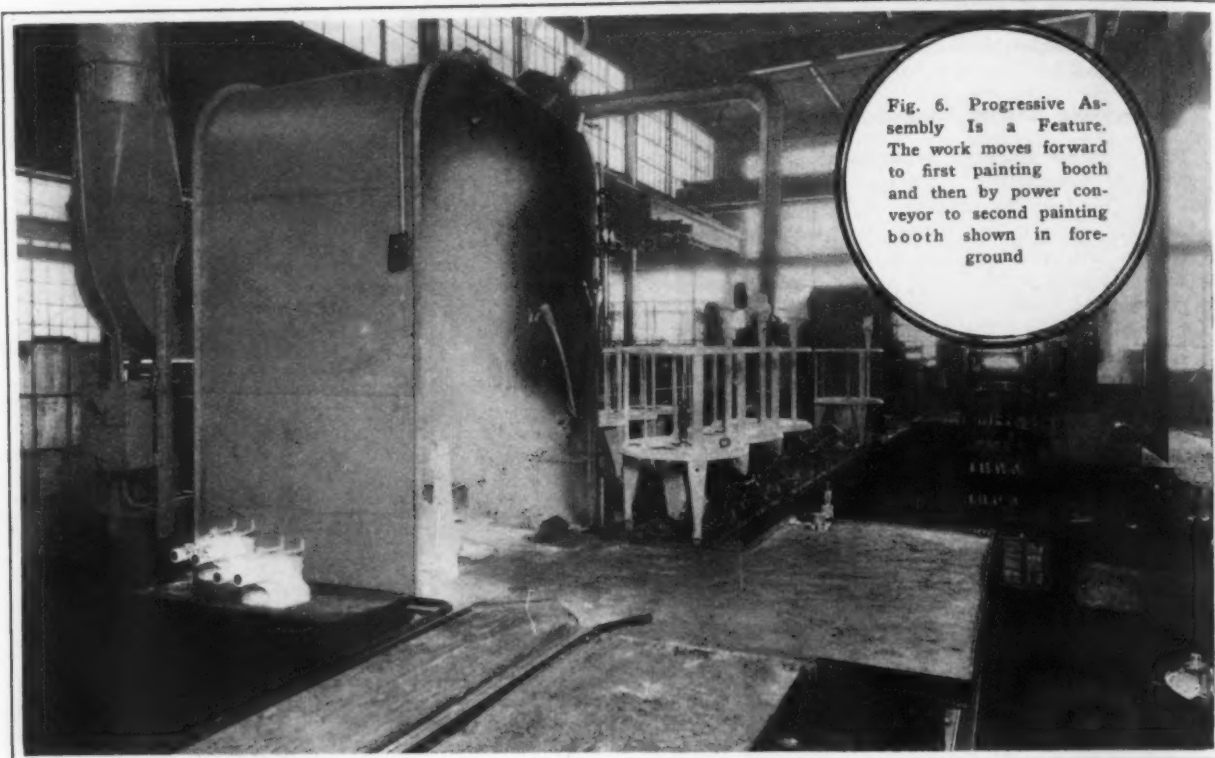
Progressive Assembly Is a Feature. The work moves forward to first painting booth and then by power conveyor to second painting booth shown in foreground
